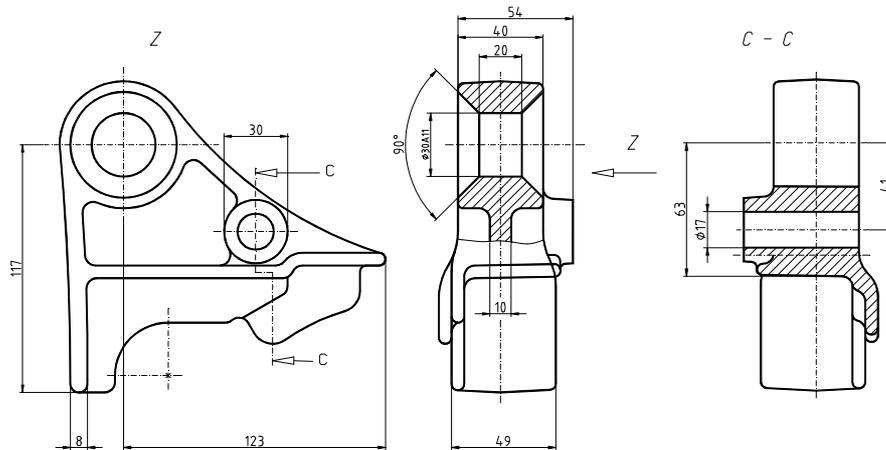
Front mounting support BM 408 (right version; welded onto the frame) MB-Nr. A 408 317 01 42
